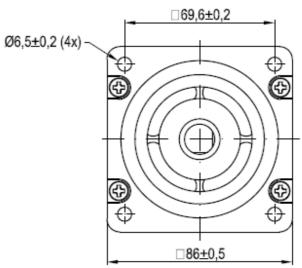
stepIM Nema 34 - Mounting (mm)
